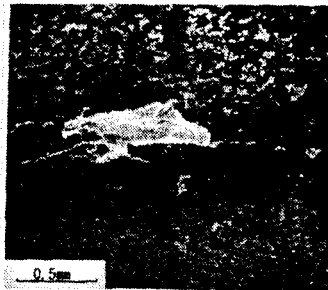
Magnification of Pitting Area after Gear Pitting Fatigue Test
